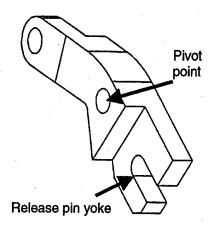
An Isometric View of a Crank Arm From the Drag Blade Release Device Assembly.
